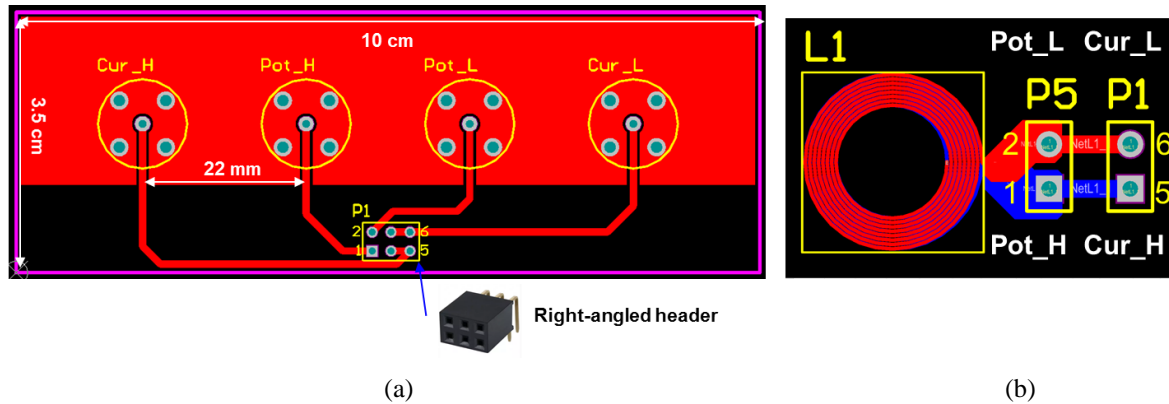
(a) Customized four-terminal testing fixture and (b) an exemplary layout of the inductor on the flexible circuit.
